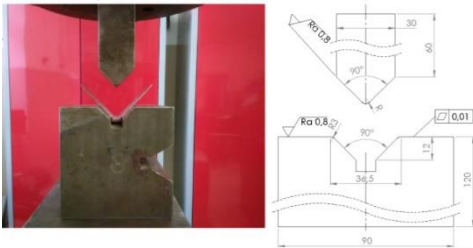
Experimental tool used for bending (left), tool scheme with dimensions (right)
